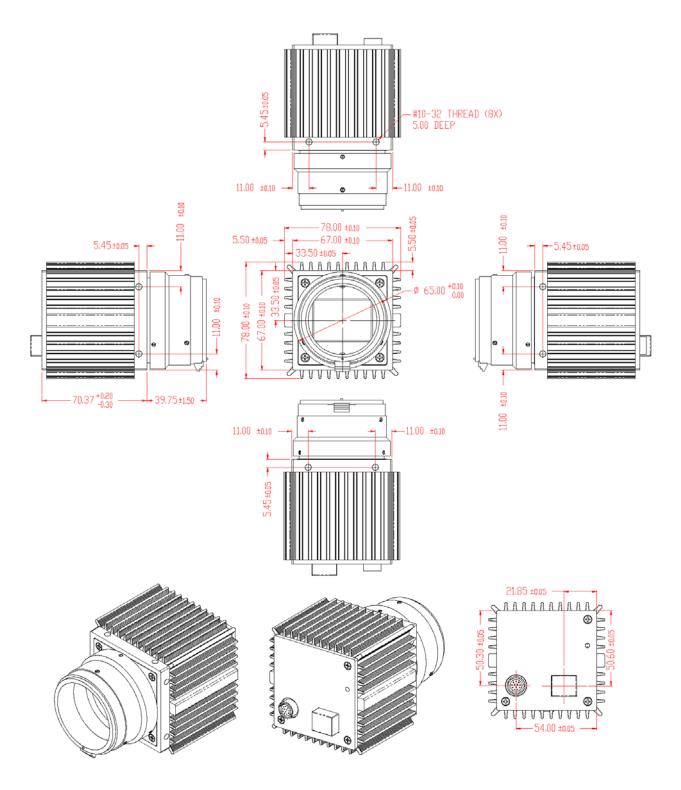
IPX-16M3-G Dimensional Drawings
